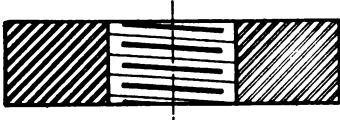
Conventional Drawing for Threads in Sectional Pieces
